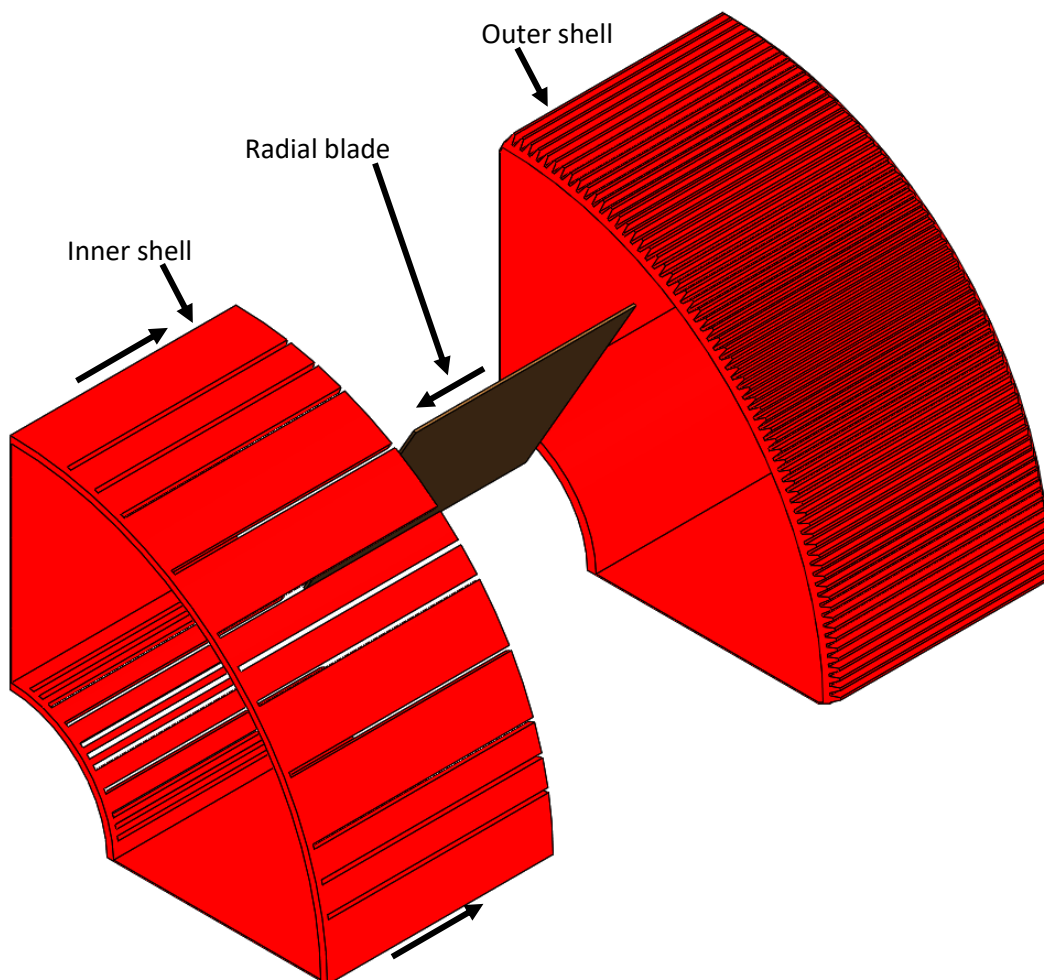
Assembly of inner and outer rotary wheel shells with copper plate radial blade
